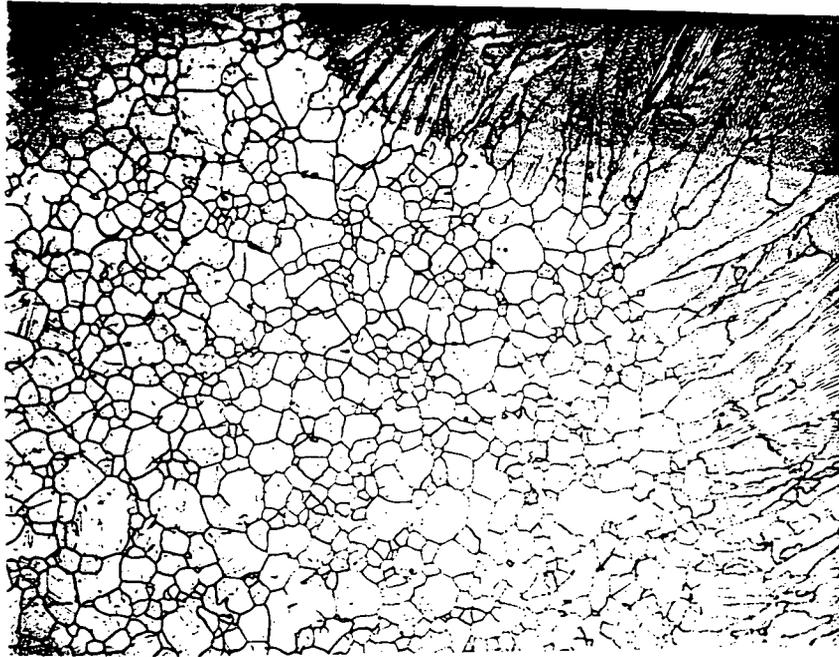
Cross section of LWS weld WP 06 without contaminant showing Inconel 690 sleeve near the weld fusion line. Mag. 100X.
